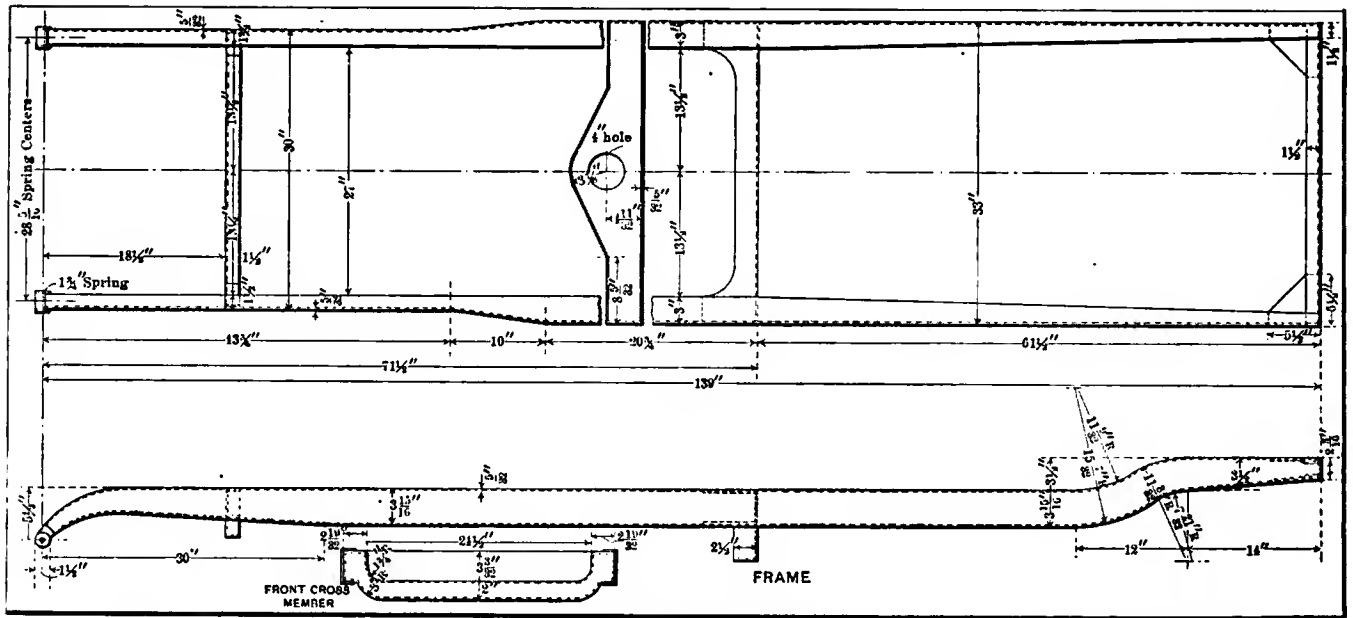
Moon 30 frame in plan and elevation, showing straight front, rear kick-up, drop cross members, and stability
